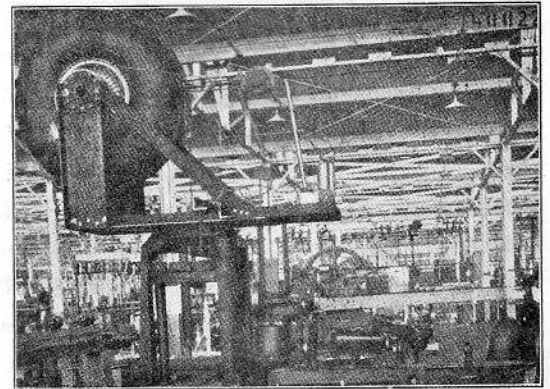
Brake Test Set-up on Universal Testing Machine for Friction and Proof Loading Tests.
